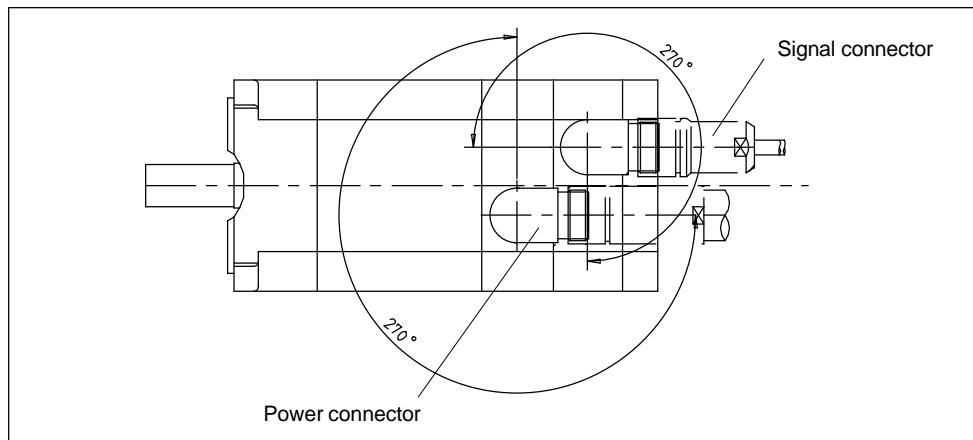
Connector which can be rotated using as an example a 1FK706□ motor
